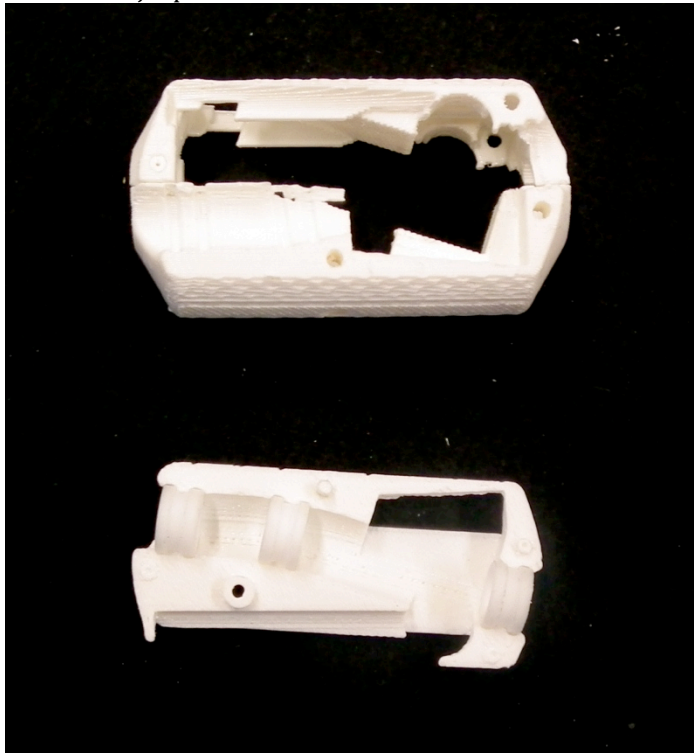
ABS 3D-printed casing for the cable-feeding module. PTFE guiding rings are already inserted in the part below.
